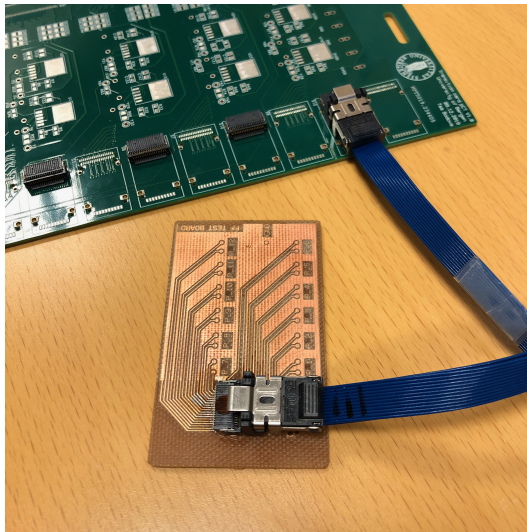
Extension board to the FireFly assembly for easier probing.
